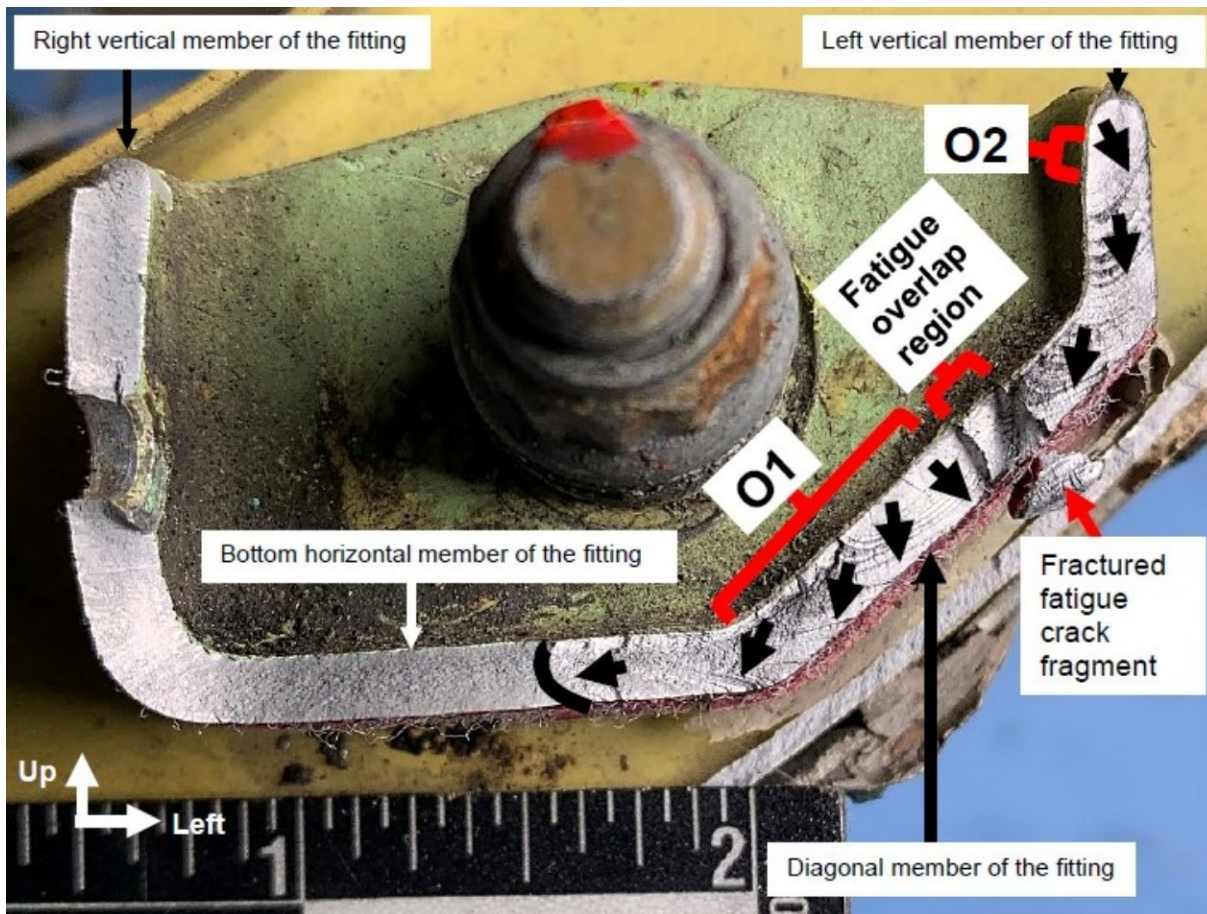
Fractured lower left fitting showing fatigue cracking indicated by brackets "O1" and "O2".
